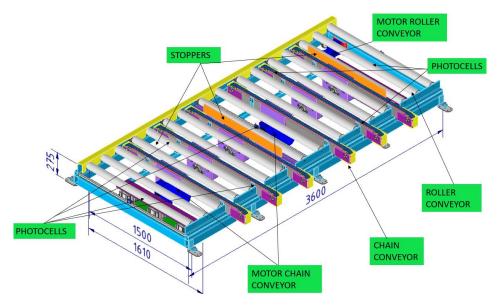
Second chain roller conveyor transporting pallets. Dimensions in mm.
